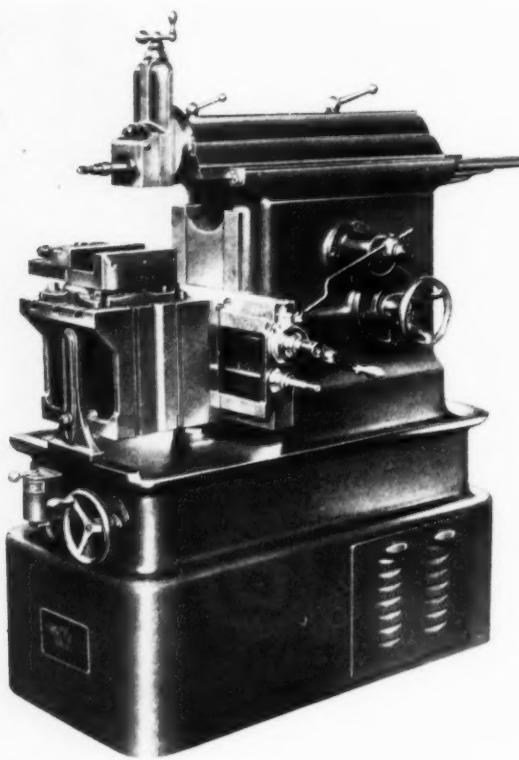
Vernon Shaper for Tool-room and Production Work, Made by the Machinery Mfg. Co.
